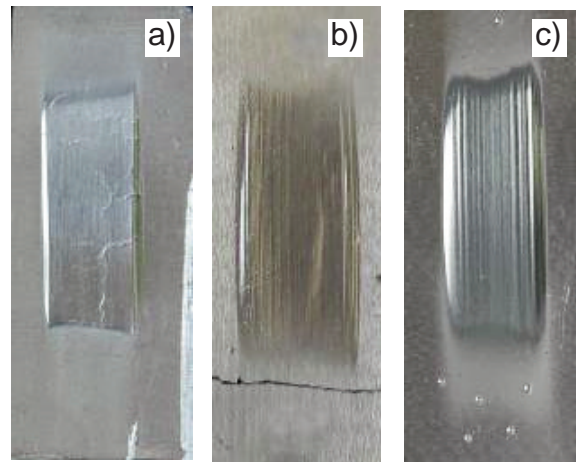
View of welded joints after bending test: (a) bending test with tensile of the wear layer; (b) bending test with tensile of the base material
